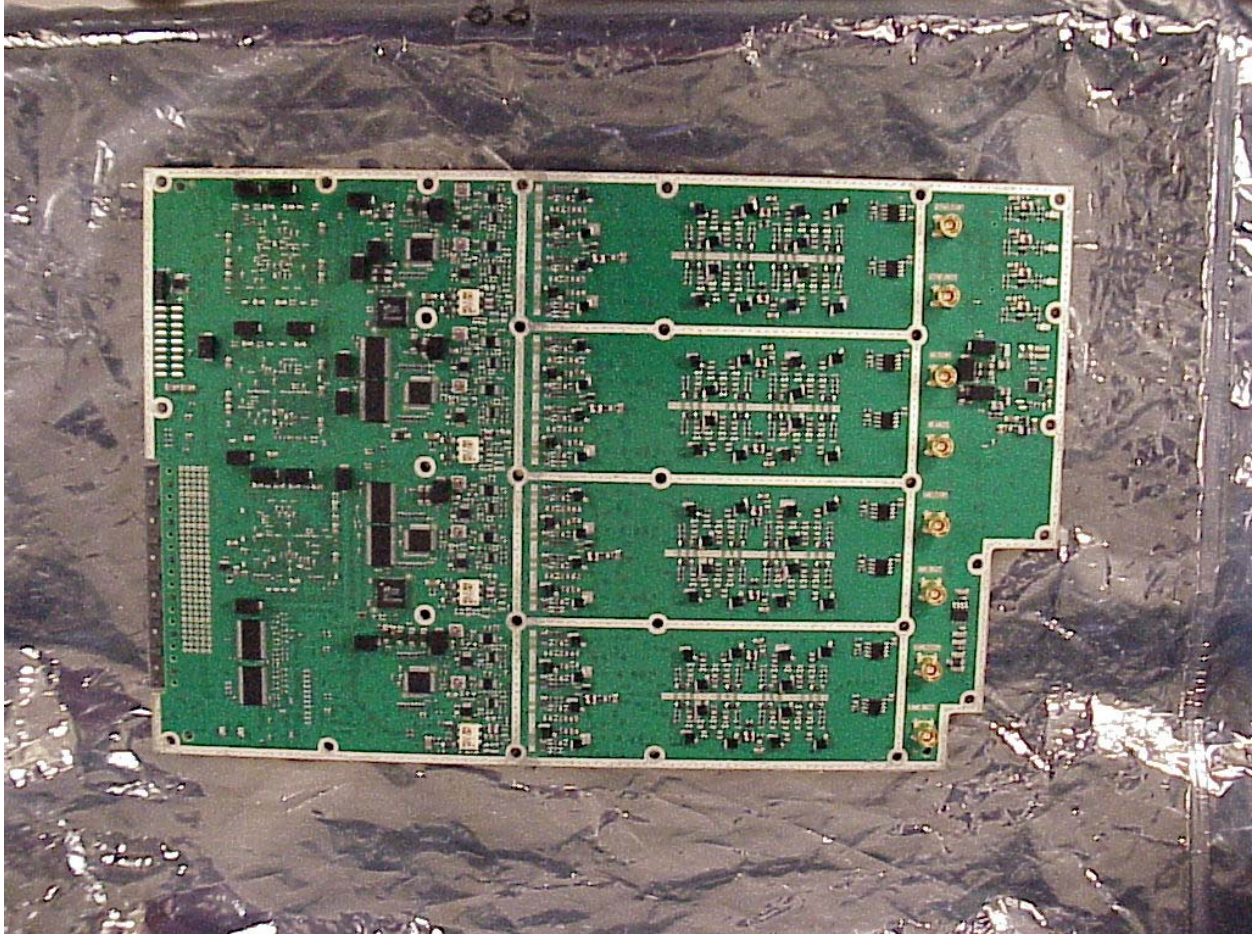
Front Side View of A5 Receiver CCA Assembly, Cover Removed
